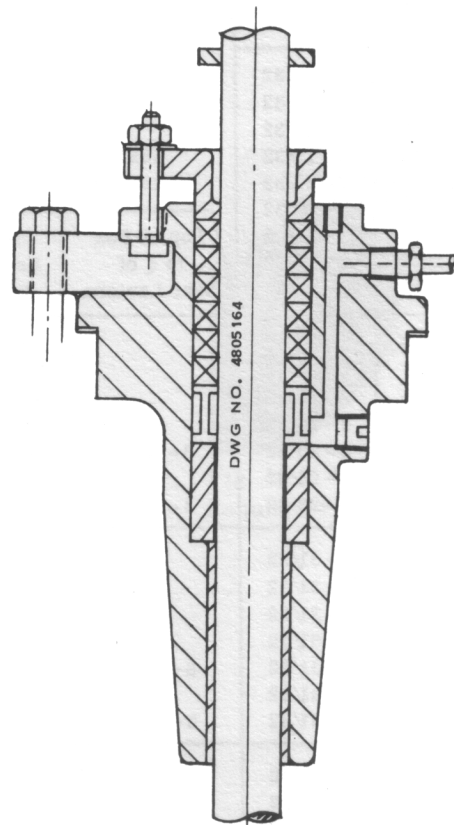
Typical packing container; consult assembly drawing for details on your particular packing arrangement.
